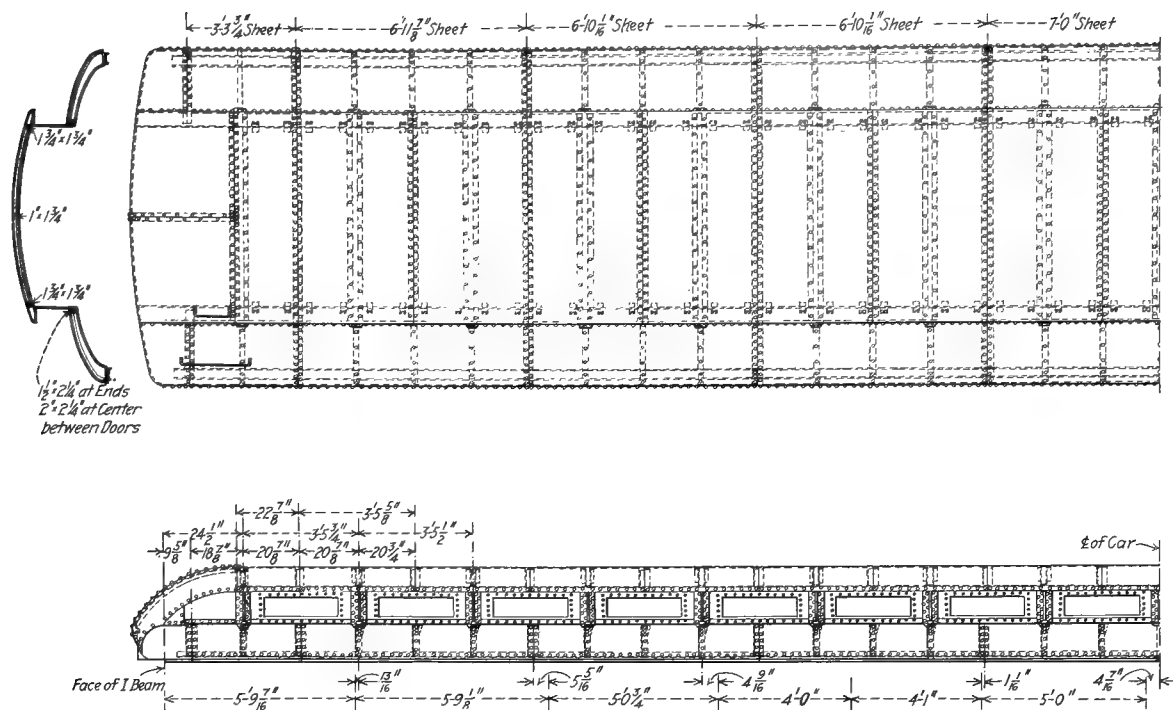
Roof Construction of Chesapeake & Ohio Steel Postal Car Shown in Figs. 375 and 376.
